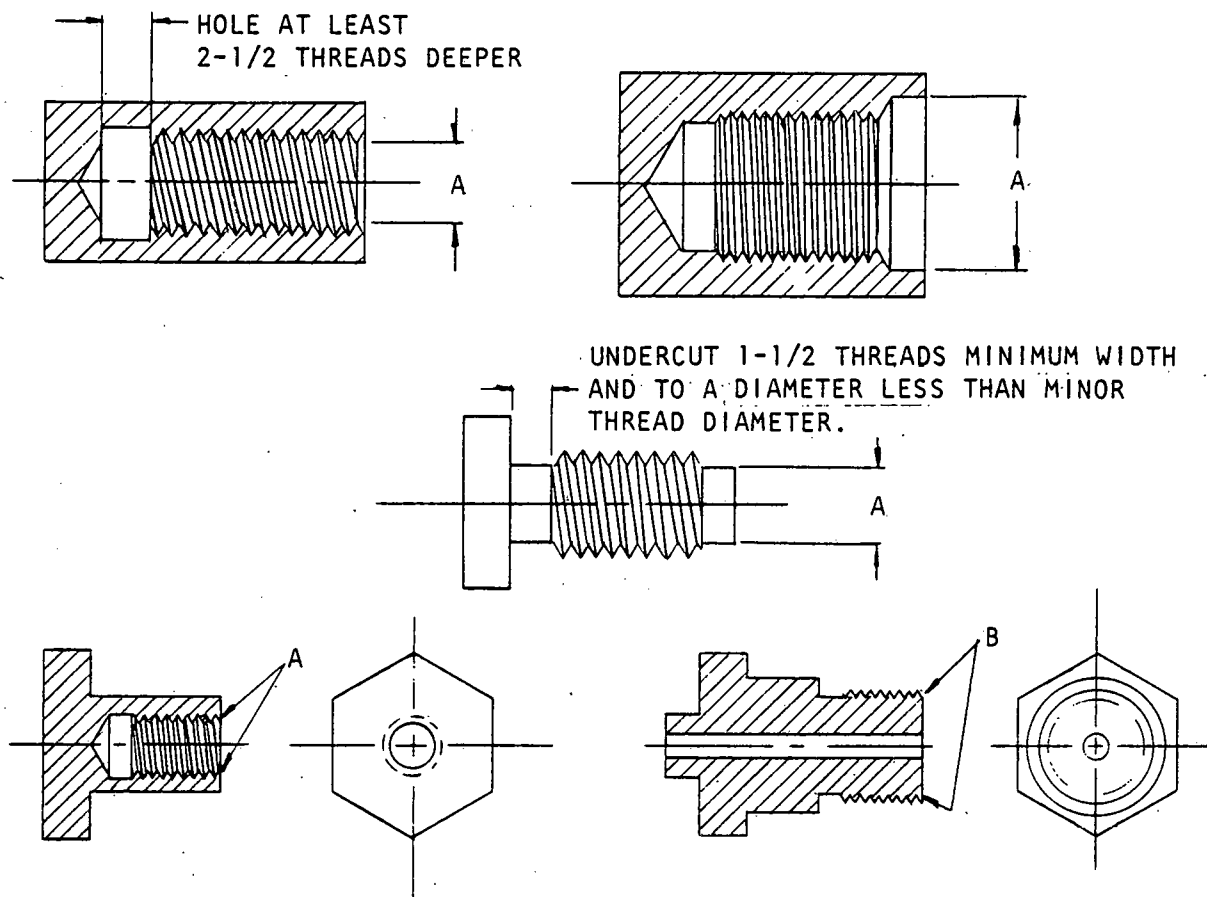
Utilize Thread Undercuts and Chamfers⁵⁵
